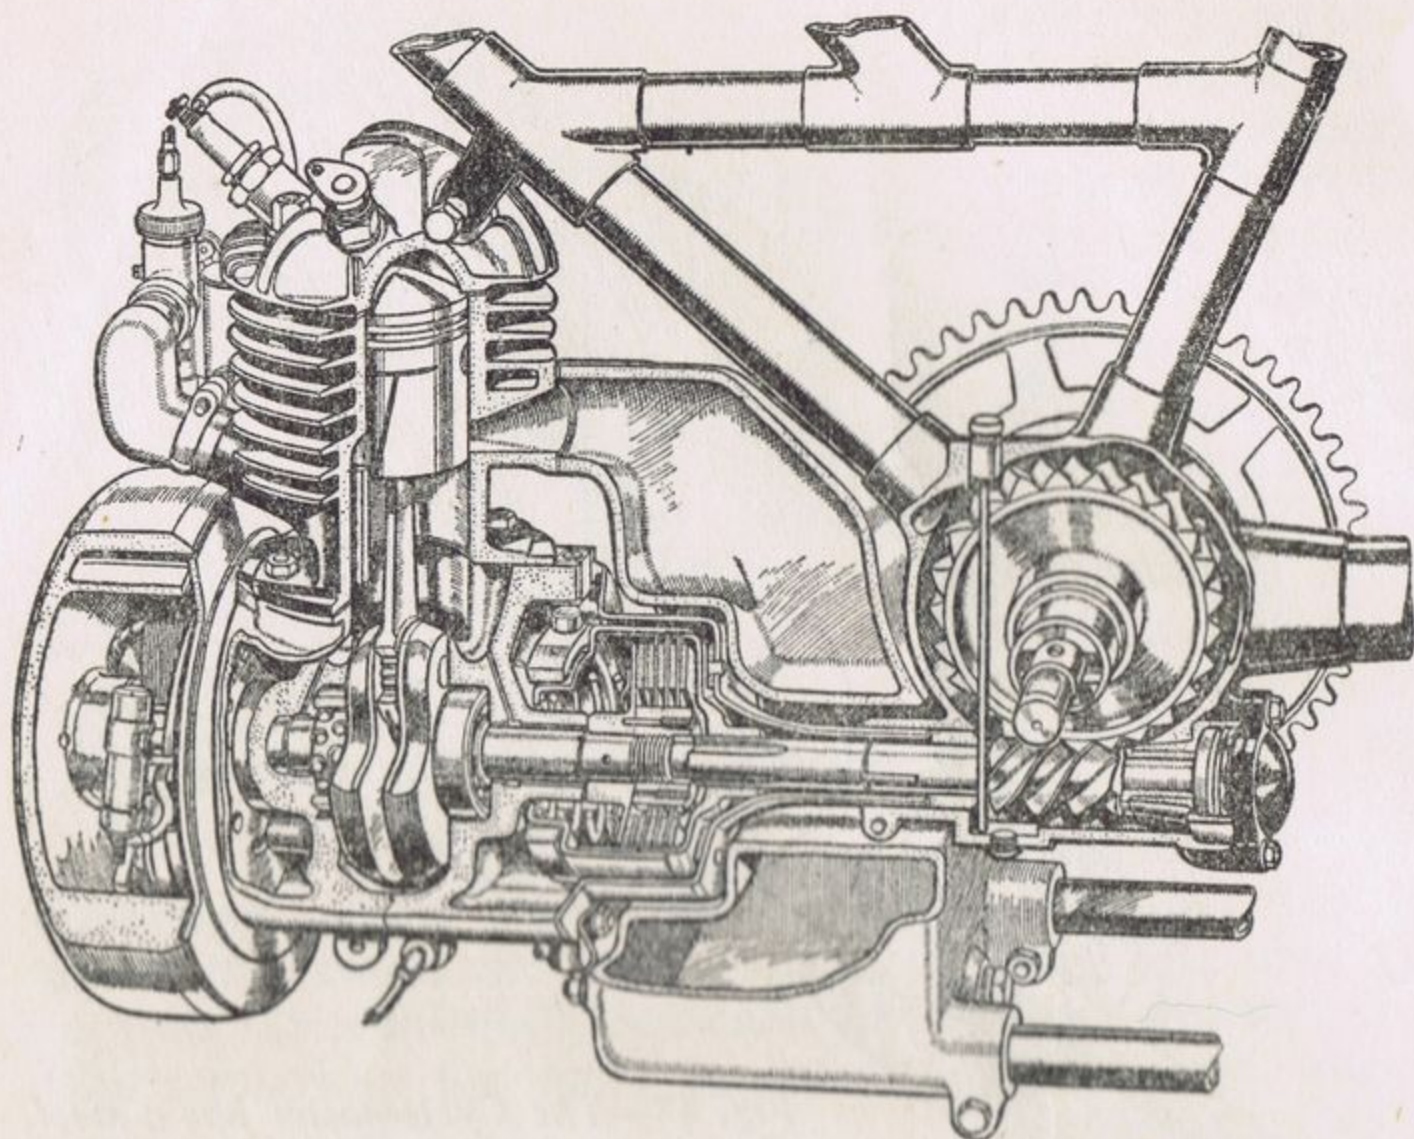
The Cyclemaster has a steel, disc-type, rotary inlet valve, which is crankshaft-driven and spring-loaded against one face of the crankcase
